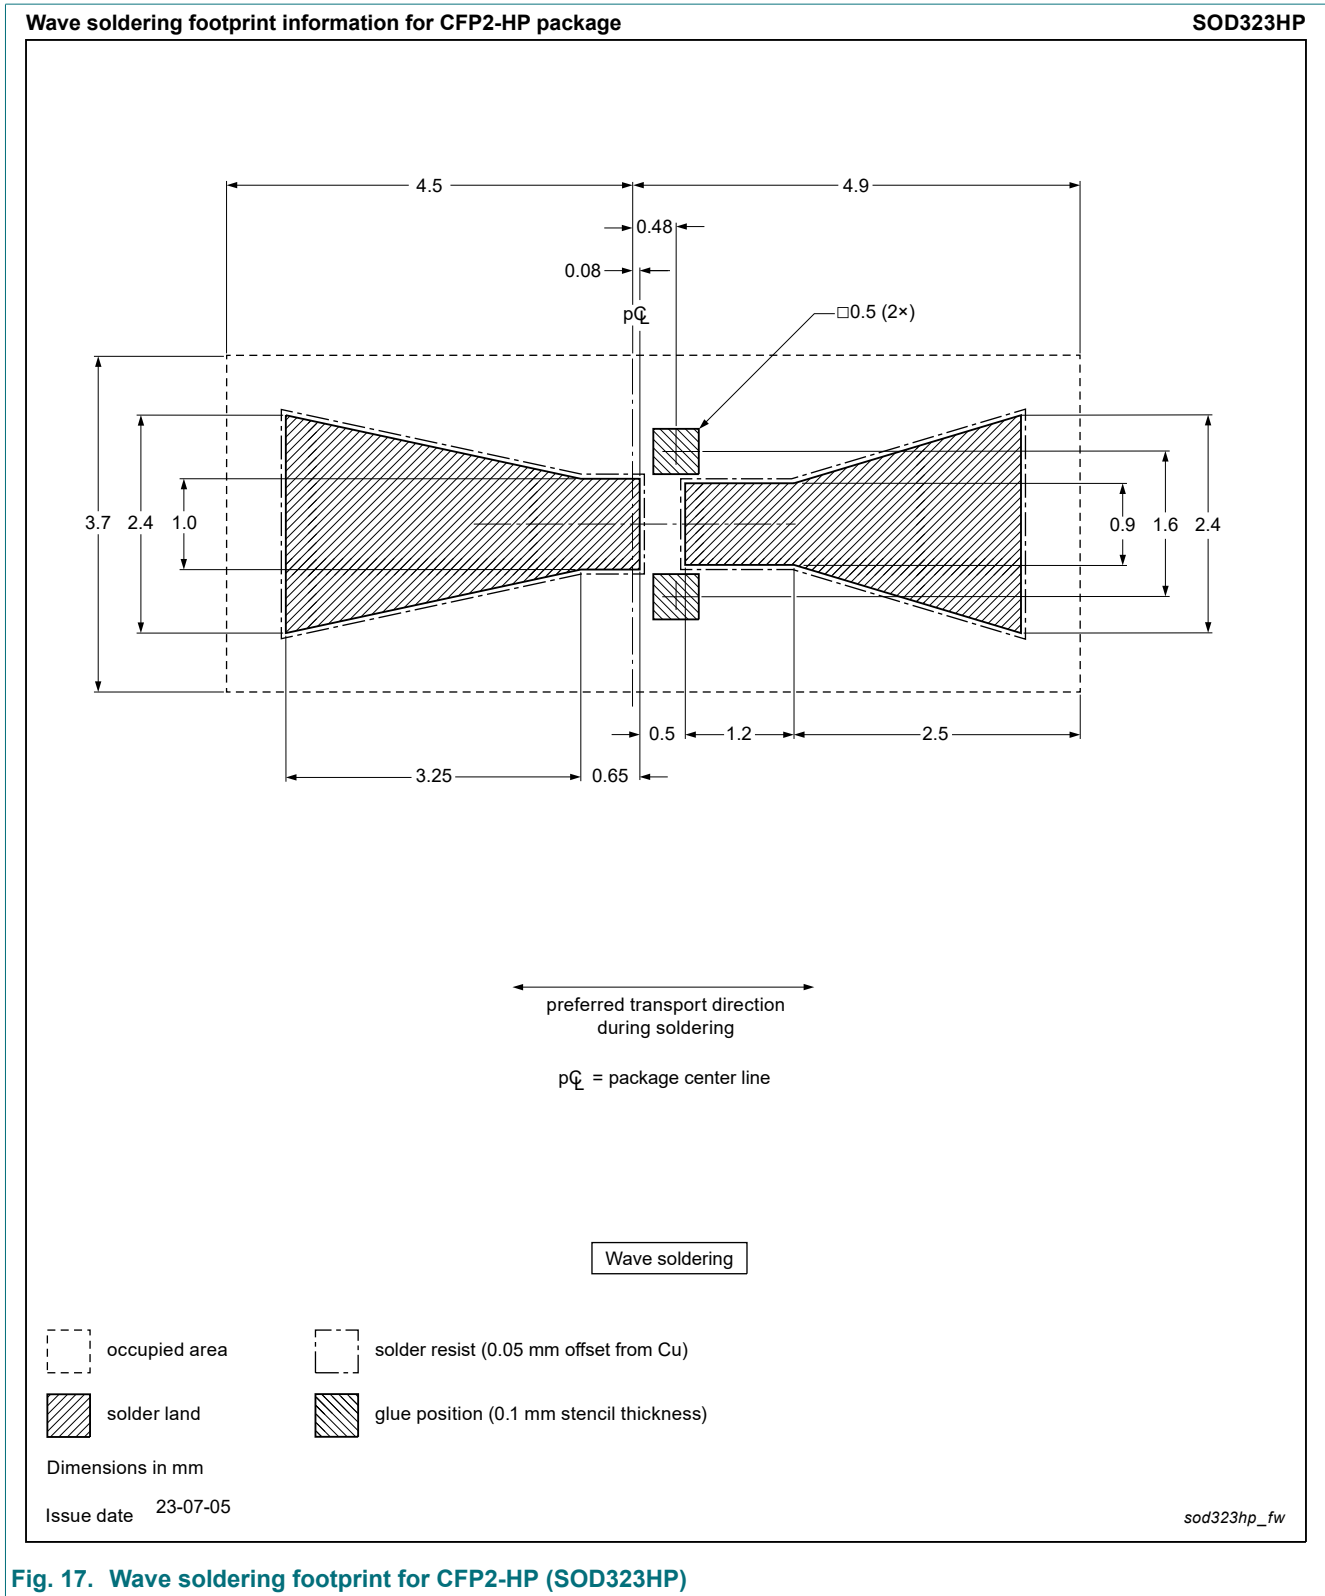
Wave soldering footprint for CFP2-HP (SOD323HP)
